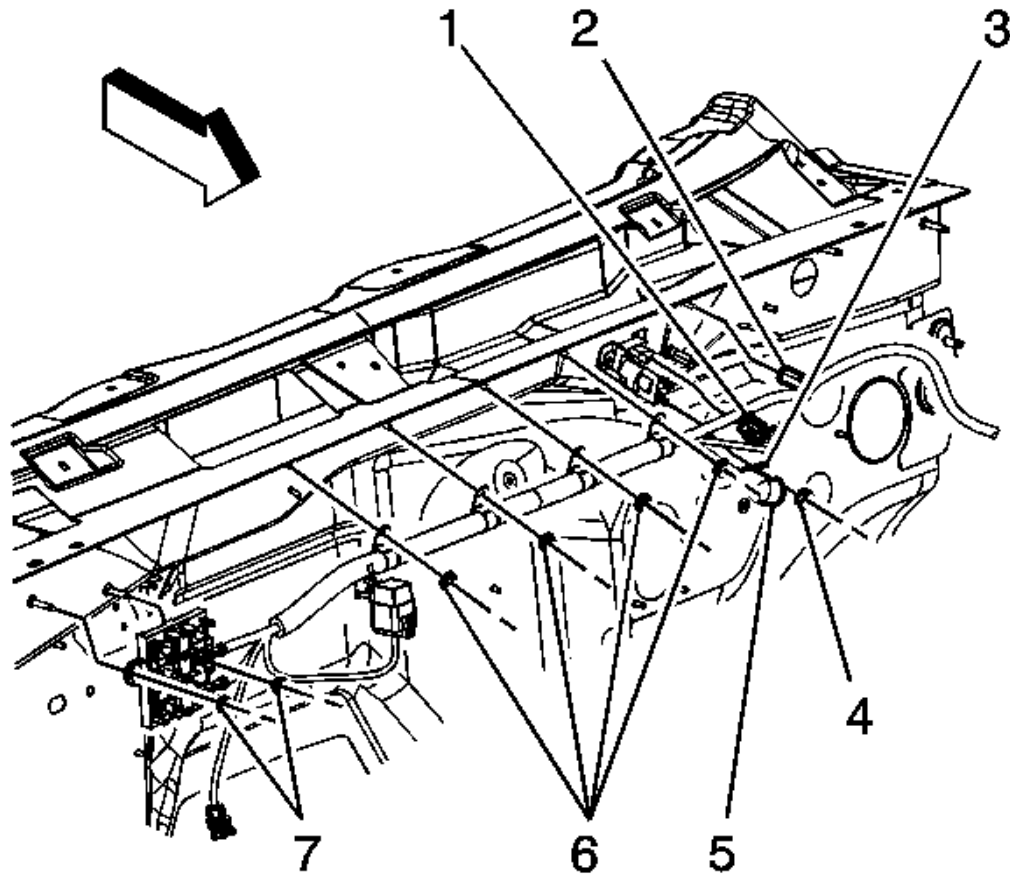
View Of Battery Cable Nuts, Retainers & Bolts
